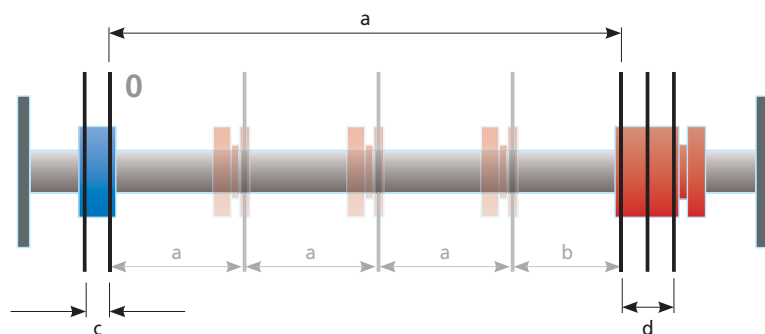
Movable saw configuration with one fixed and up to four movable saw bushes
